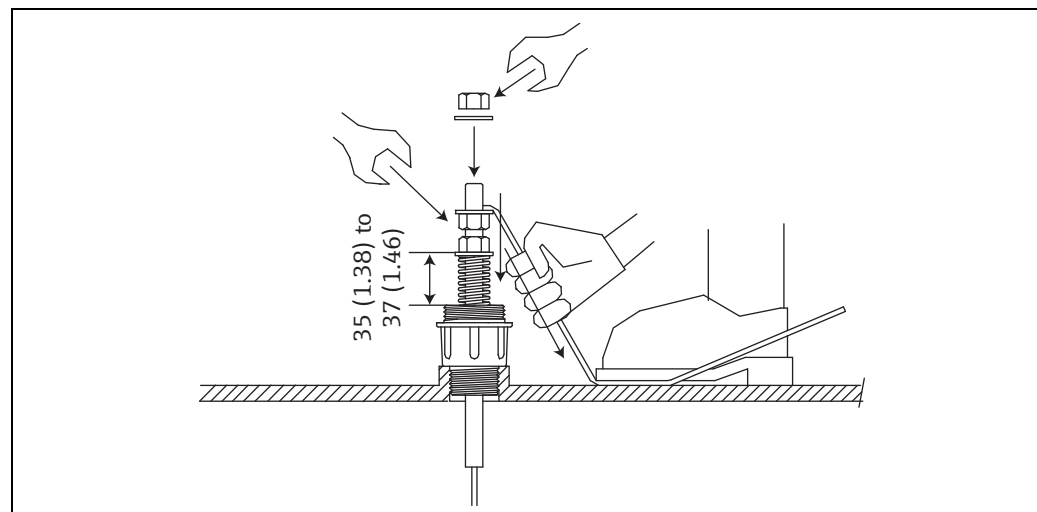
Top Anchor Attachment-2, Unit of Measurement: mm (in)
